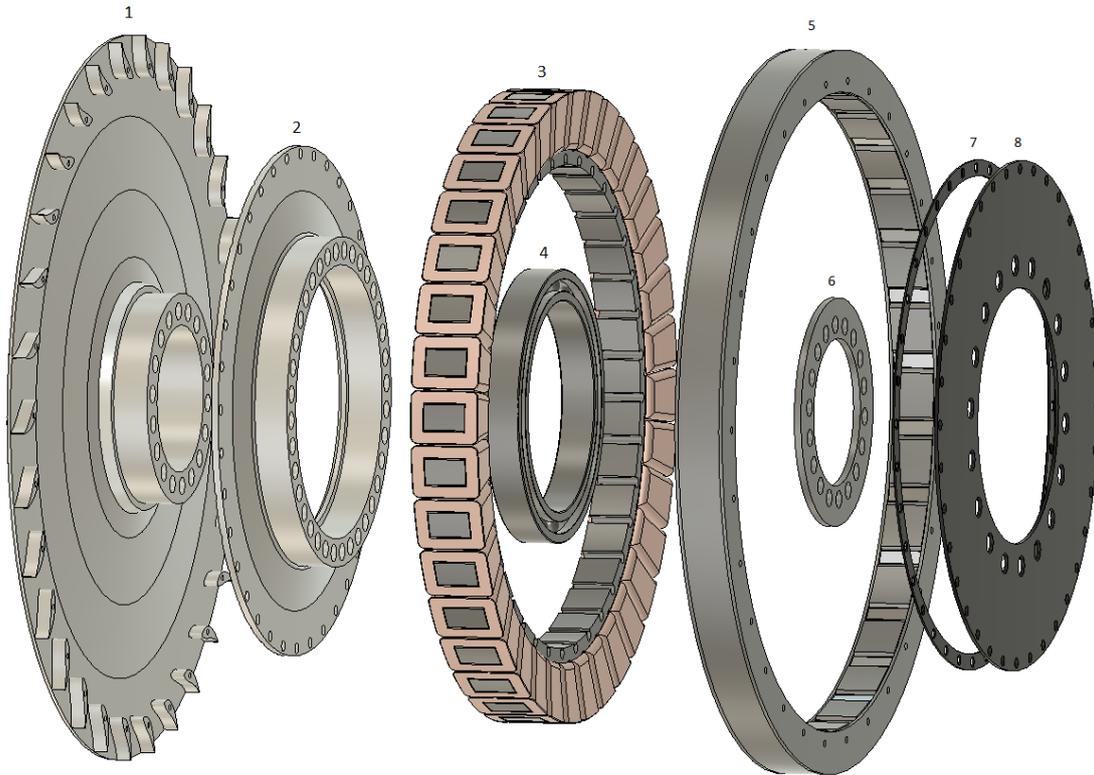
Exploded view of the electrical motor with numbered components. 1: Stator, 2: Rotor, 3: Cobalt-steel core with coils, 4: Ball bearing, 5: Magnets with carbon fibre plates, 6: Part for locking the ball bearing, 7: Distance plate for stator, 8: Distance plate for stator.
